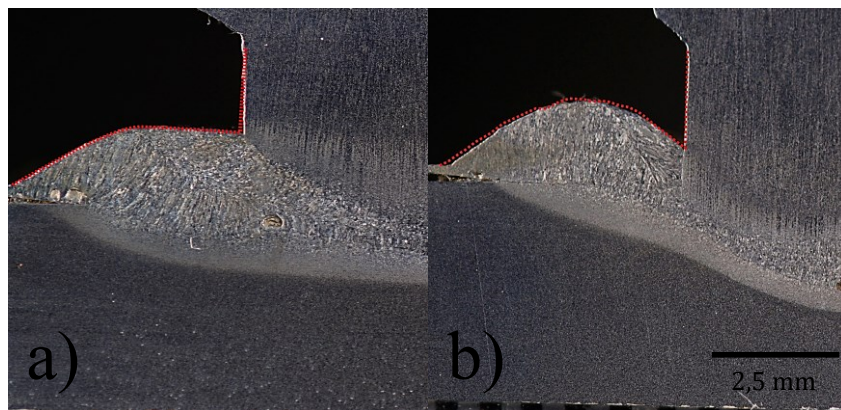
Welding Collar Formation a) Collar formed with C15 gas, b) Collar formed with pure CO₂
